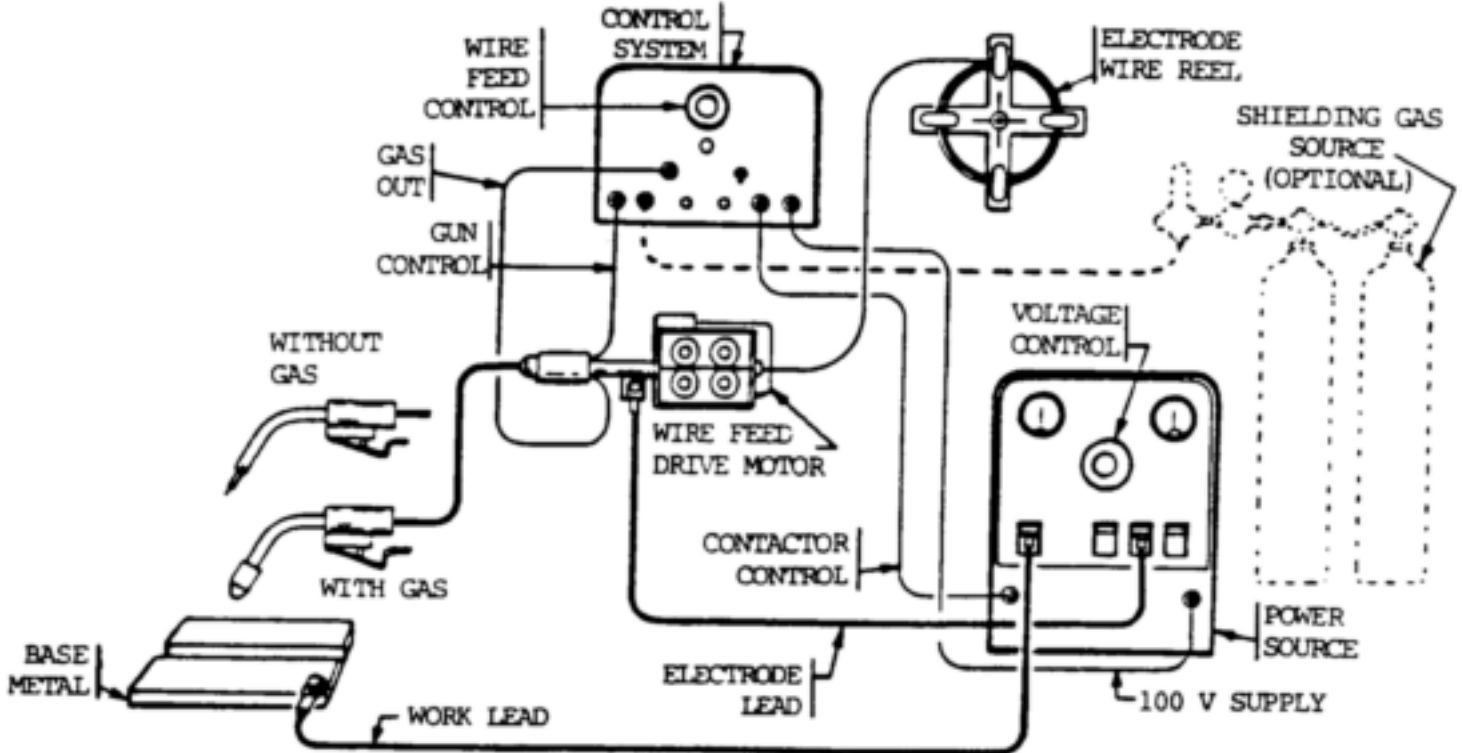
Equipment for flux-cored arc welding.
